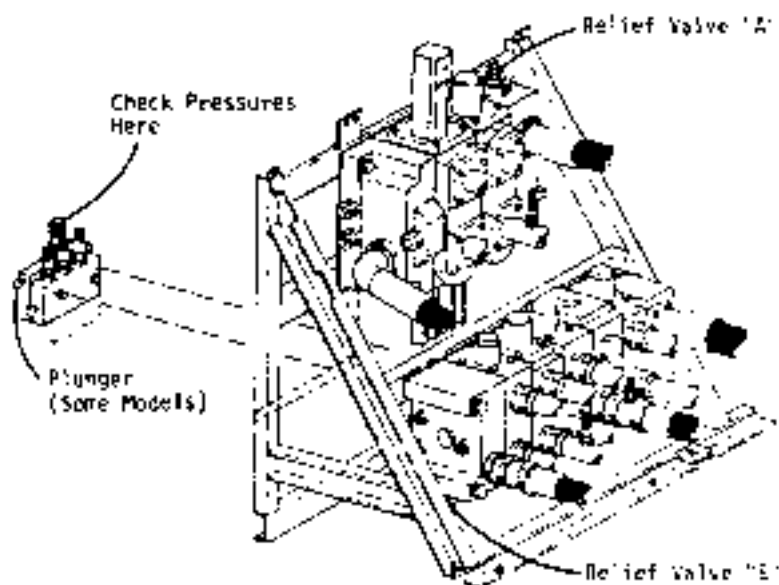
Control Valve Assembly (Early models with pressure checking manifold)
